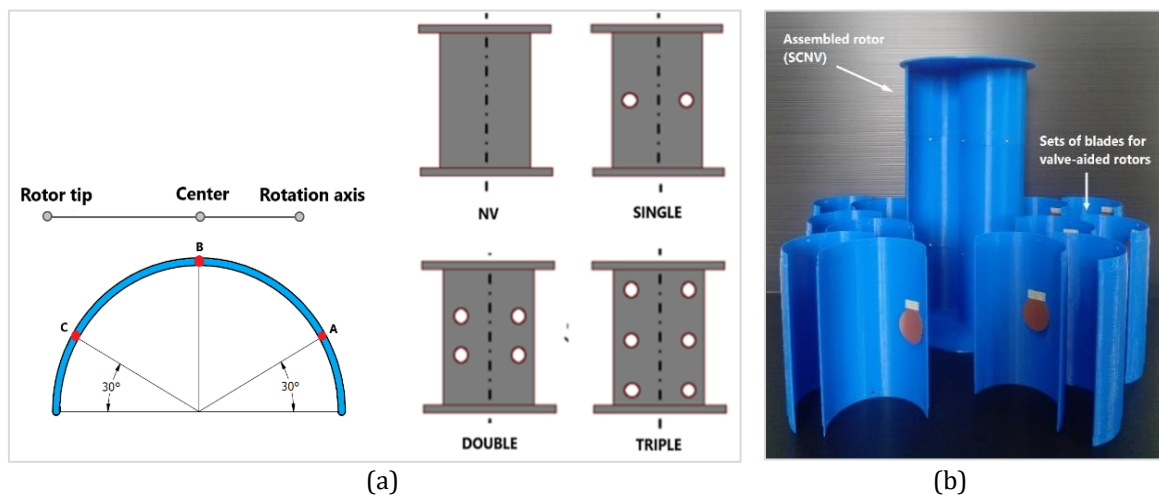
(a) Valve locations and arrangement on the rotor; (b) 3D printed rotors
